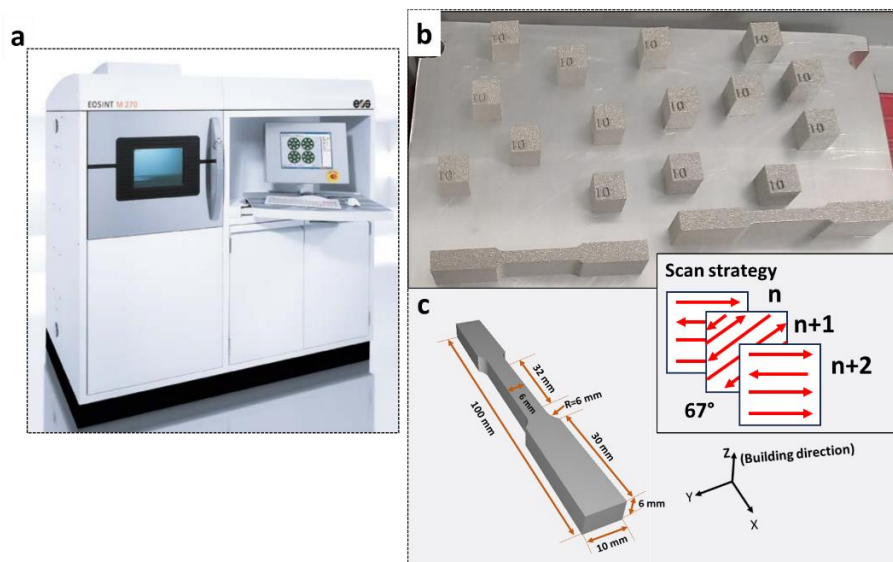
(a) EOS M270 machine, (b) build plate after printing, and (c) schematic of a tensile specimen with ASTM E8 dimensions obtained after EDM cutting.
